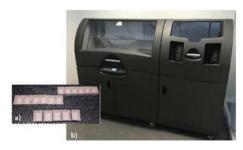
a) Printed specimens; b) FEUP's ProJet 660 PRO Series machine.
